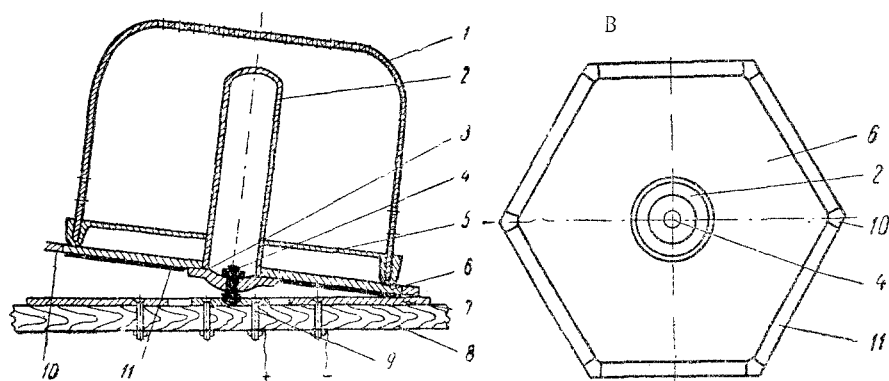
Chamber of actometer in cross section (A) and its bottom view (B).
